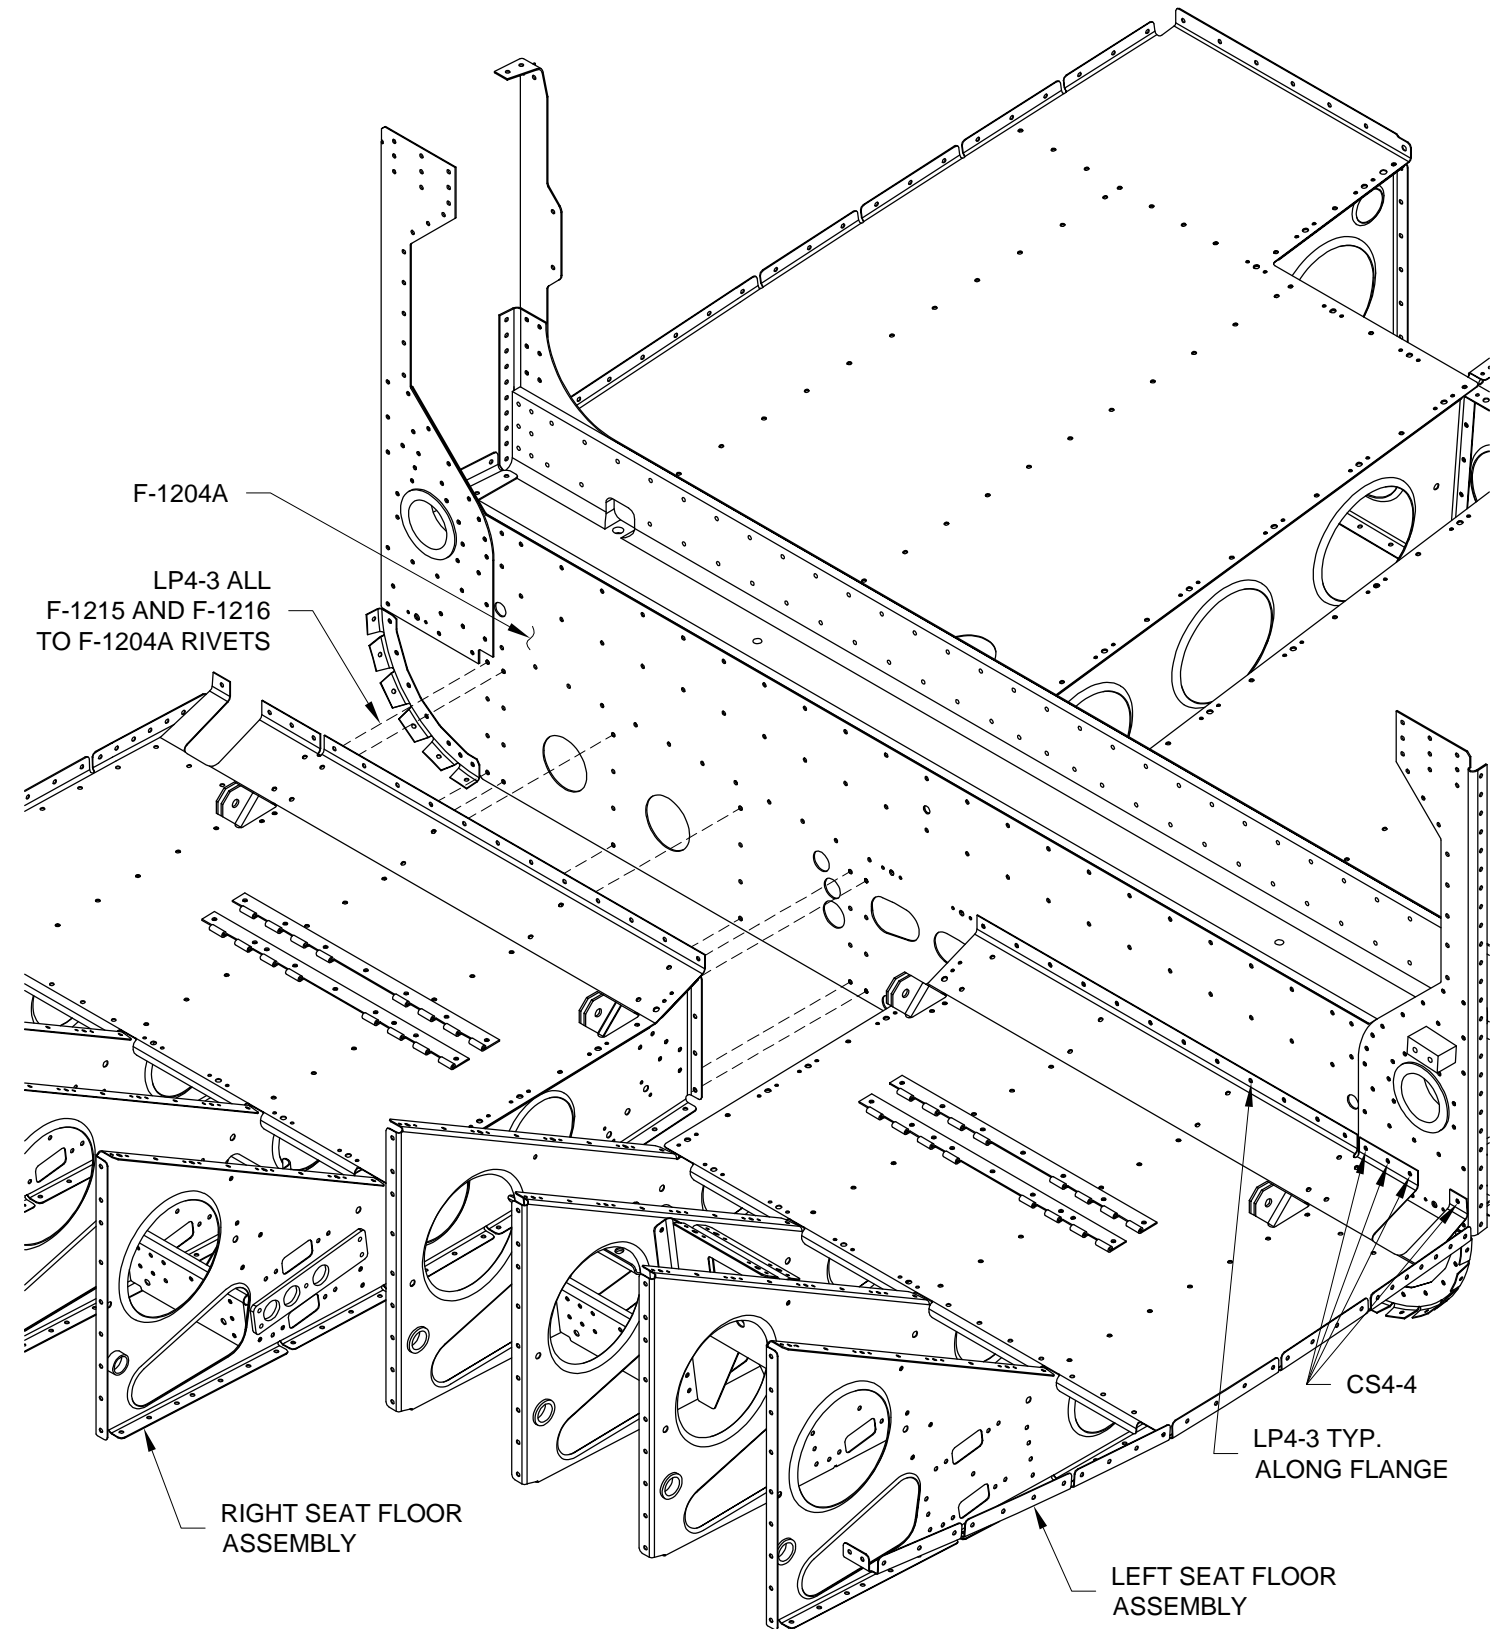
RIVET SEAT FLOOR ASSEMBLIES
